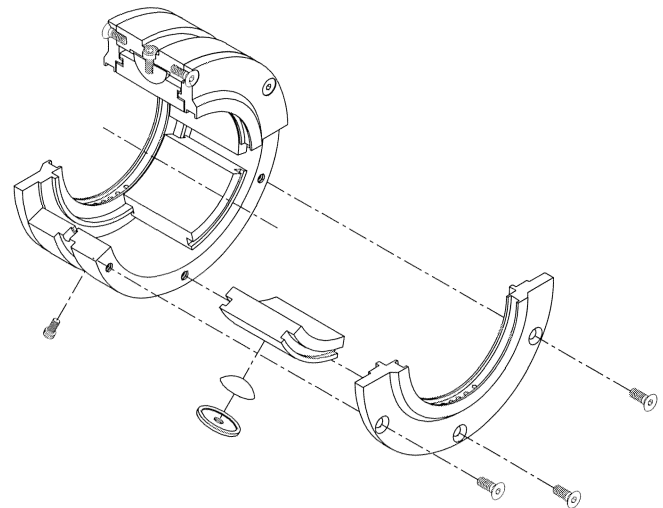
Exploded View of Five-Pad Tilting Pad Bearing. (Courtesy of Turbo Components and Engineering, Inc.)
